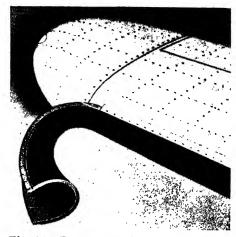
De-icers may be arranged so they may be installed or removed without damage to the aircraft structure. (Courtesy The B. F. Goodrich Company.)
